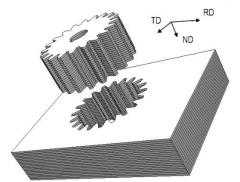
A scheme of cog-wheel cutting out of a multilayer steel blank.
